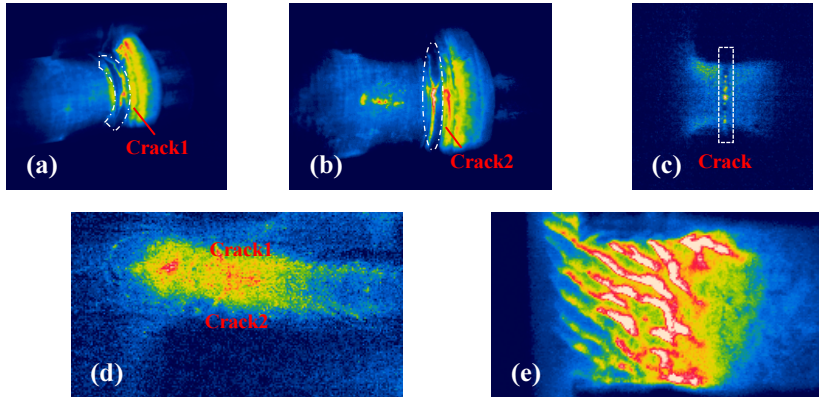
Detection results of (a)(b) screw (c) stainless steel plate (d) weld crack and (e) RCFs by using L-shaped yoke
